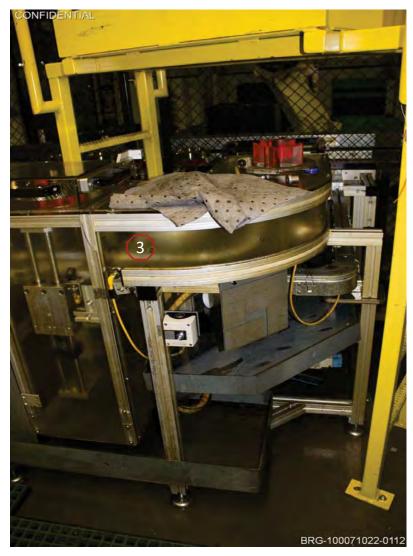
Gear Hobbing Machine (Backside)
